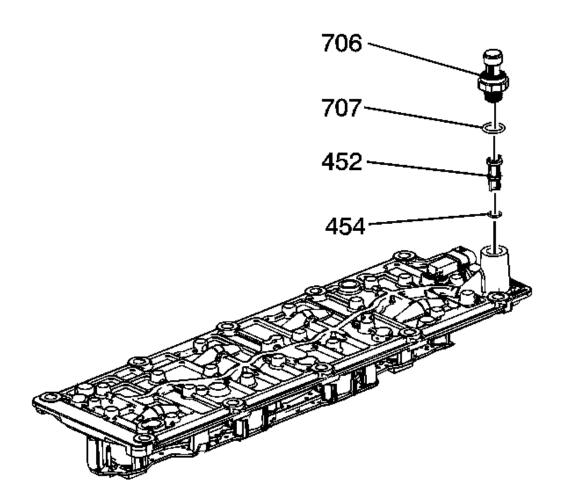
View Of Oil Pressure Sensor, Washer And Valve Lifter Oil Filter Courtesy of GENERAL MOTORS CORP.
